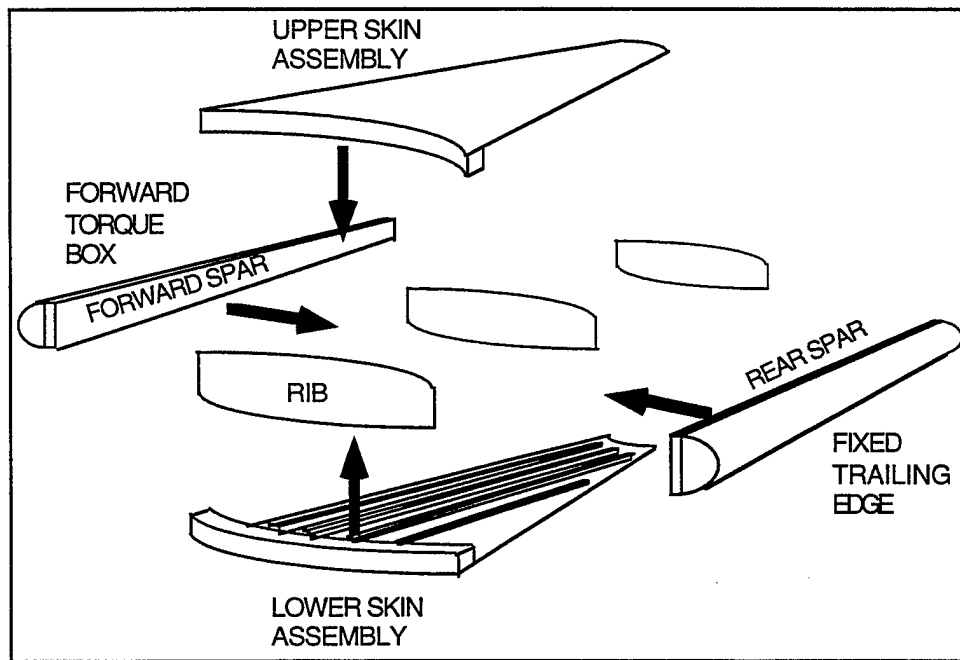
Exploded view of parts making up the horizontal stabilizer. The upper and lower skins, ribs, and spars (attached to the FTB and FTE) make up the main torque box.
